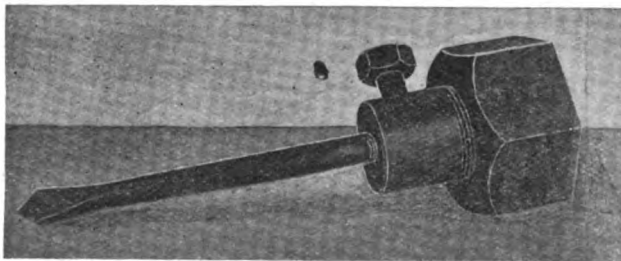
A SIMPLE CHUCK FOR THE LATHE.
